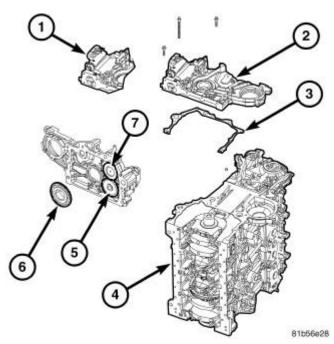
Vacuum Pump And Oil Pump Courtesy of CHRYSLER LLC
